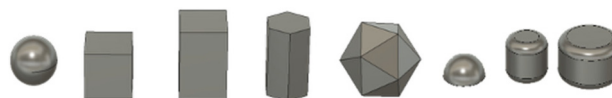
New milling body geometries. From left to right: milling ball, cube, cuboid, hexagonal prism, icosahedron, half sphere, cylinder (diameter 10 mm), cylinder (diameter 15 mm). The milling bodies are not in scale, and technical drawings can be found in the SI.
